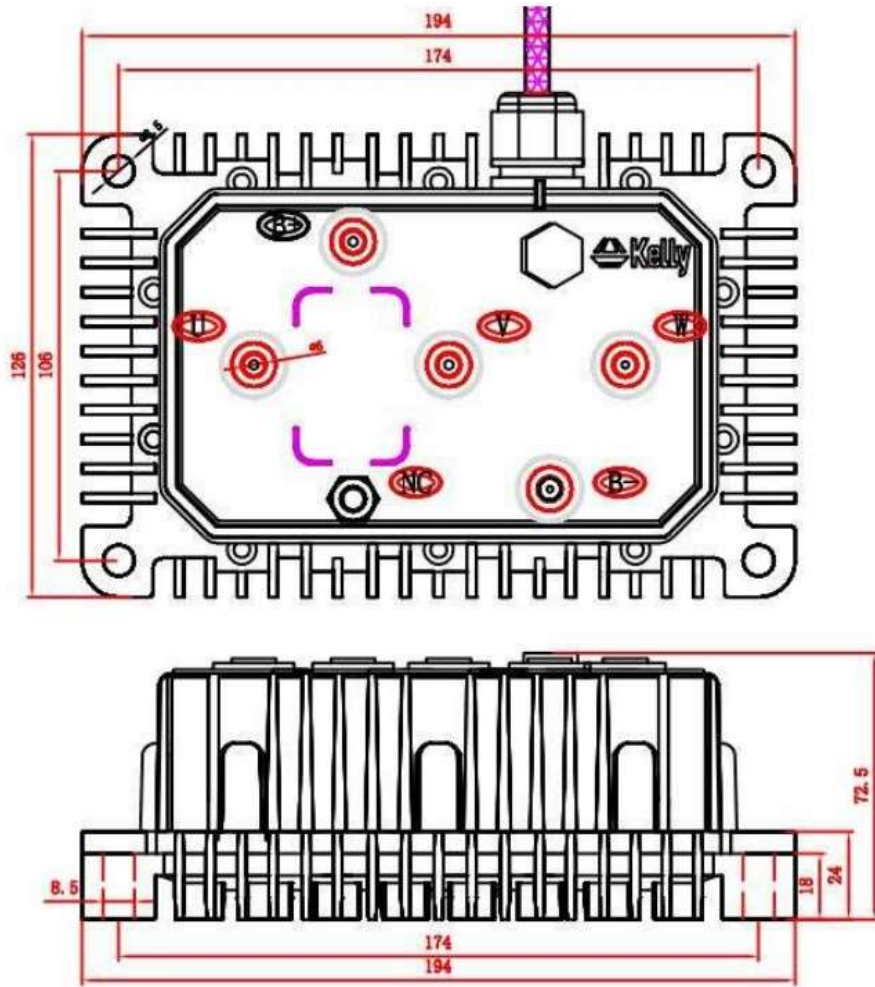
KLS2418N, KLS6018N, KLS7218N mounting holes' dimensions (dimensions in millimeters)
